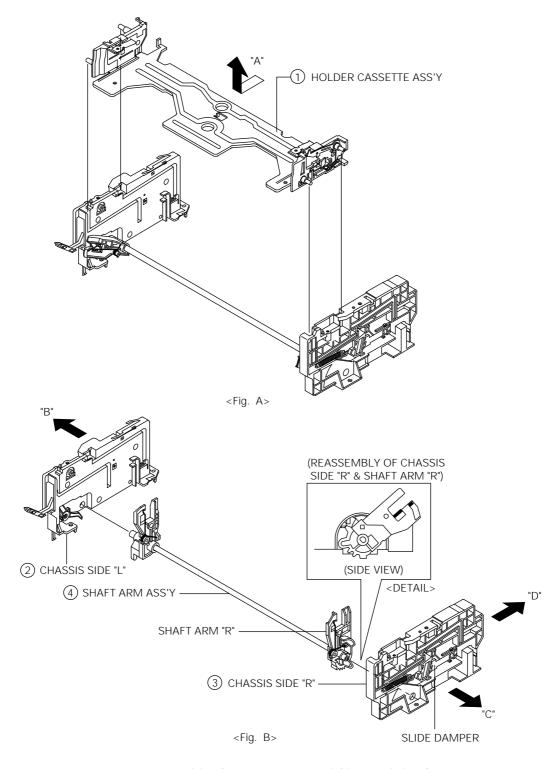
Holder Cassette Ass'y and Chassis Side L/R
